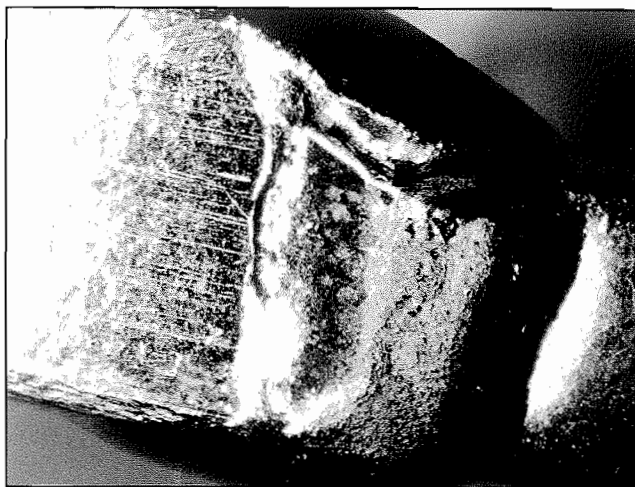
Fusion weld in resized Pt-Ir alloy
